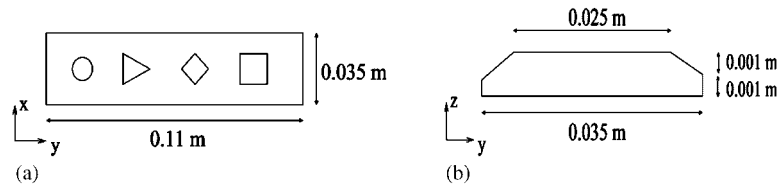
Dimensions of mold with interior ‘obstacles’: (a) top view and (b) lateral view.
